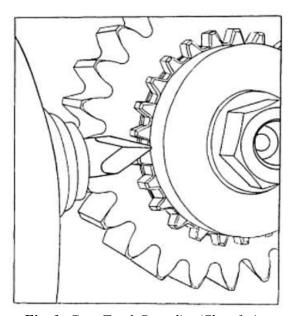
Gear Tooth Rounding/Chamfering Machine.
